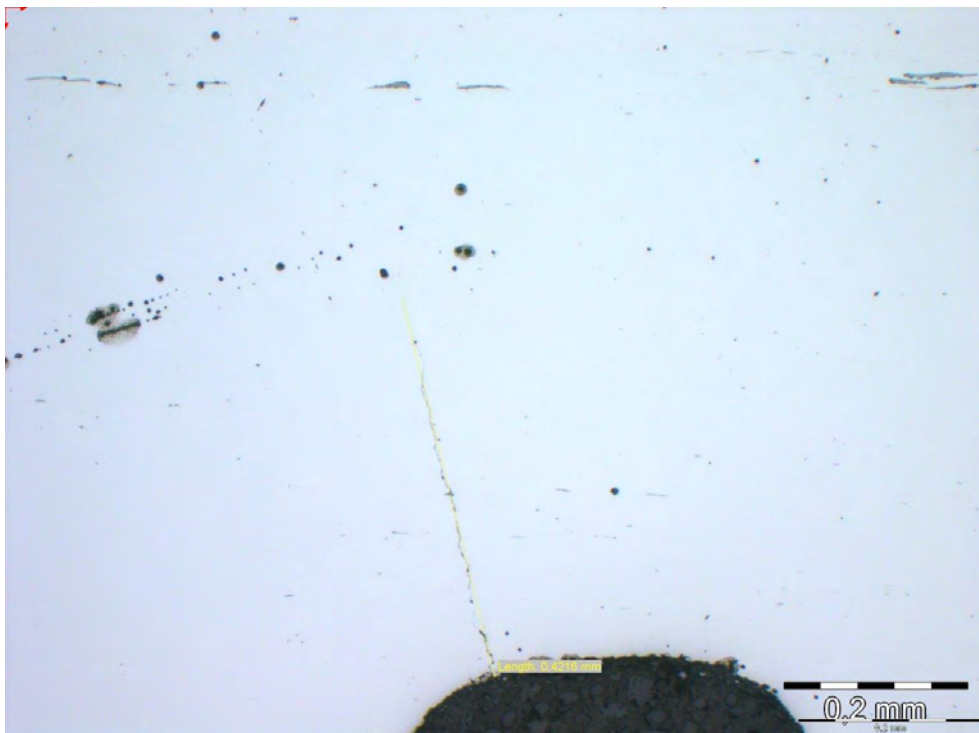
Crack at segment C, second ridge on barrel no. 8832/6713
